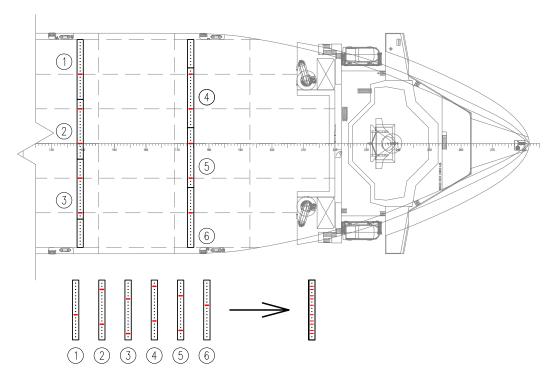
Determination of the locations of transverse stiffeners, based on intersections with bulkheads of the MC
